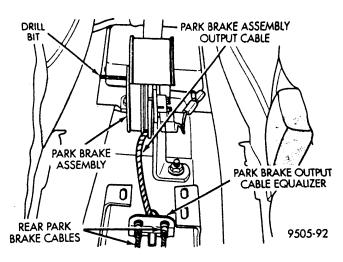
Park Brake Cables Properly Installed In Equalizer
